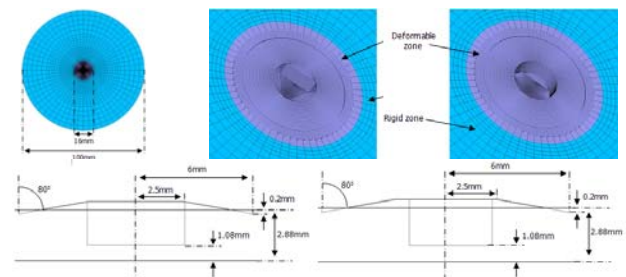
Top view for cylindrical pin and triangular pin (upper), and model dimension (lower).
